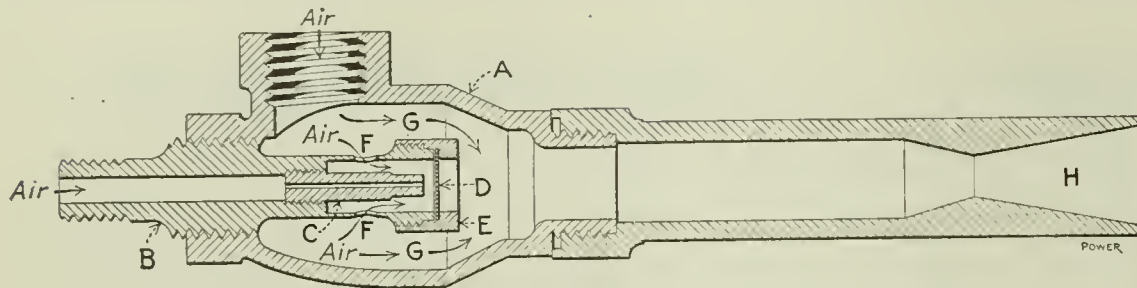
SECTIONAL VIEW OF THE ALBEE CRUDE-OIL BURNER
